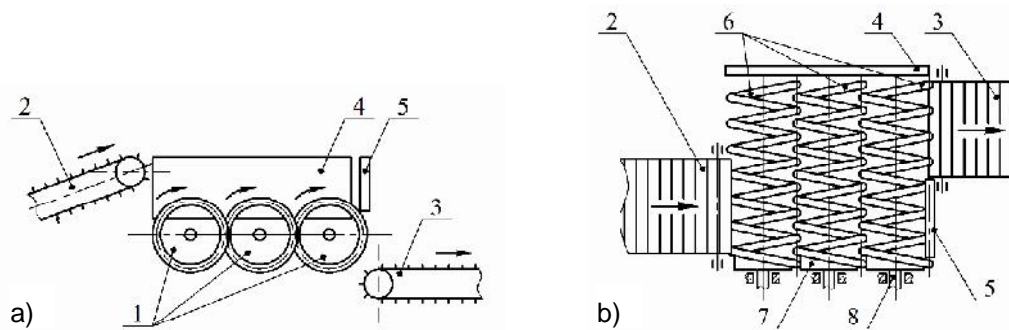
Structural layout of spiral potato heap separator: a – side view, b – top view; 1 – spirals; 2 – feeding conveyor; 3 – discharge conveyor; 4 – side protective apron; 5 – face protective apron; 7 – hub; 8 – drive shaft (Bulgakov et al., 2019).
